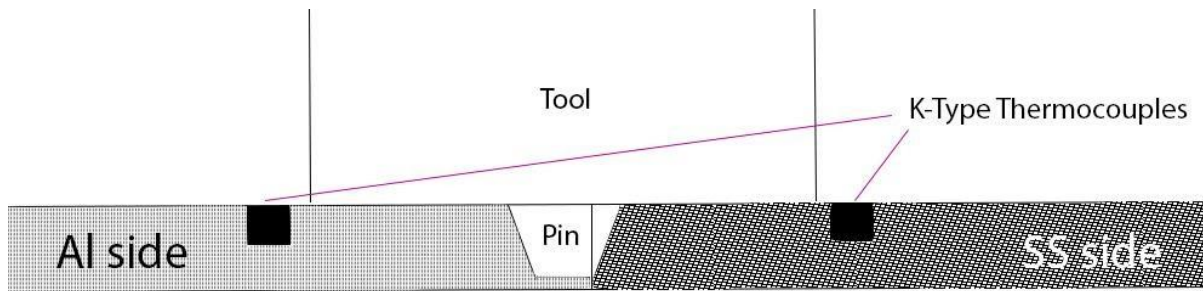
Schematic cross section of weld with offset through aluminum side and thermocouples positions.
